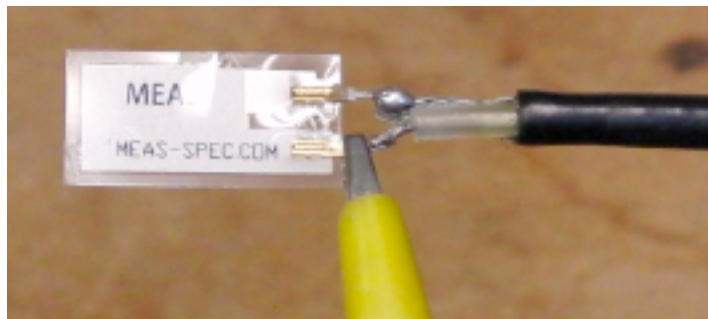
Using an alligator clip as a heat sink to protect the piezo film from getting too hot while soldering.
